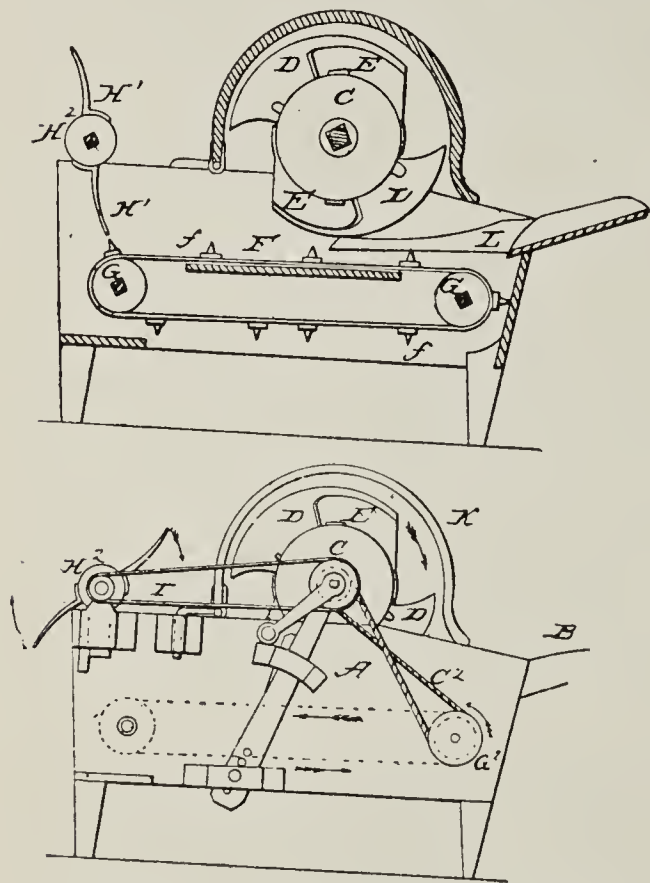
I. H. PALMER'S BAND CUTTER AND SELF FEEDER, WITH ROTARY BAND CUTTER AND REVOLVING RADDLE.
